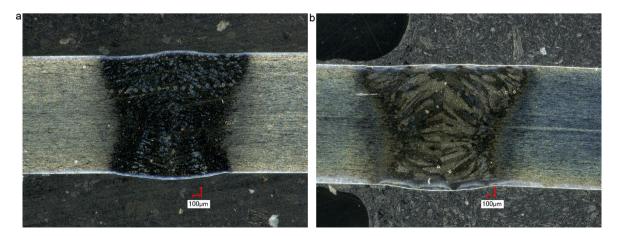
Cross sections of the 2 kW, 1.5 m/min welds: (a) argon shield, (b) nitrogen shield.
